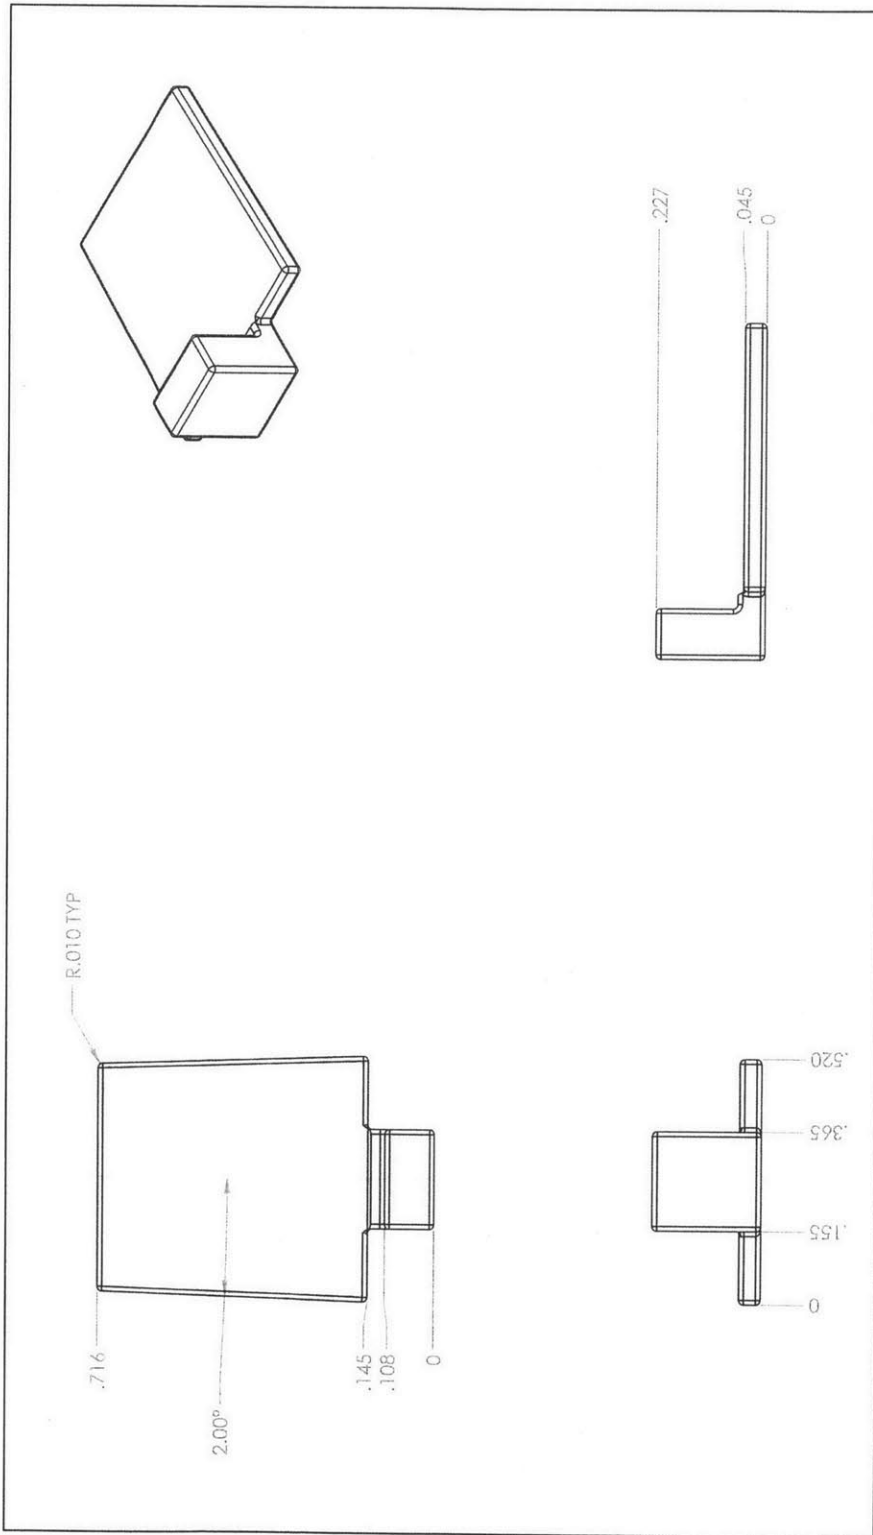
Drawing of LC circuit location inside the lock. Unit is inch.
